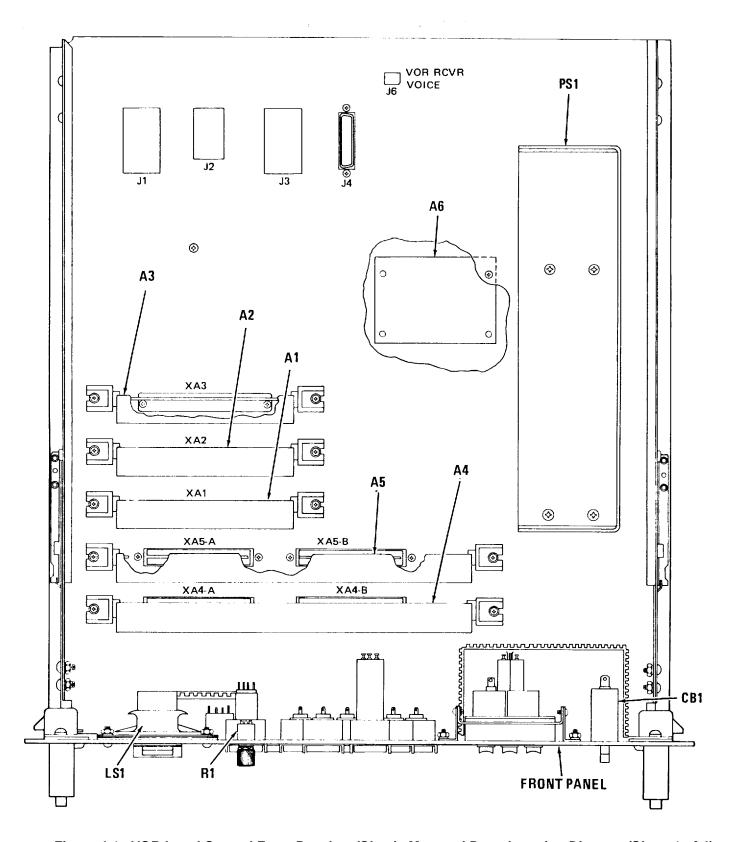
VOR Local Control Front Panel and Chasis Mounted Parts Location Diagram (Sheet 1 of 4)
